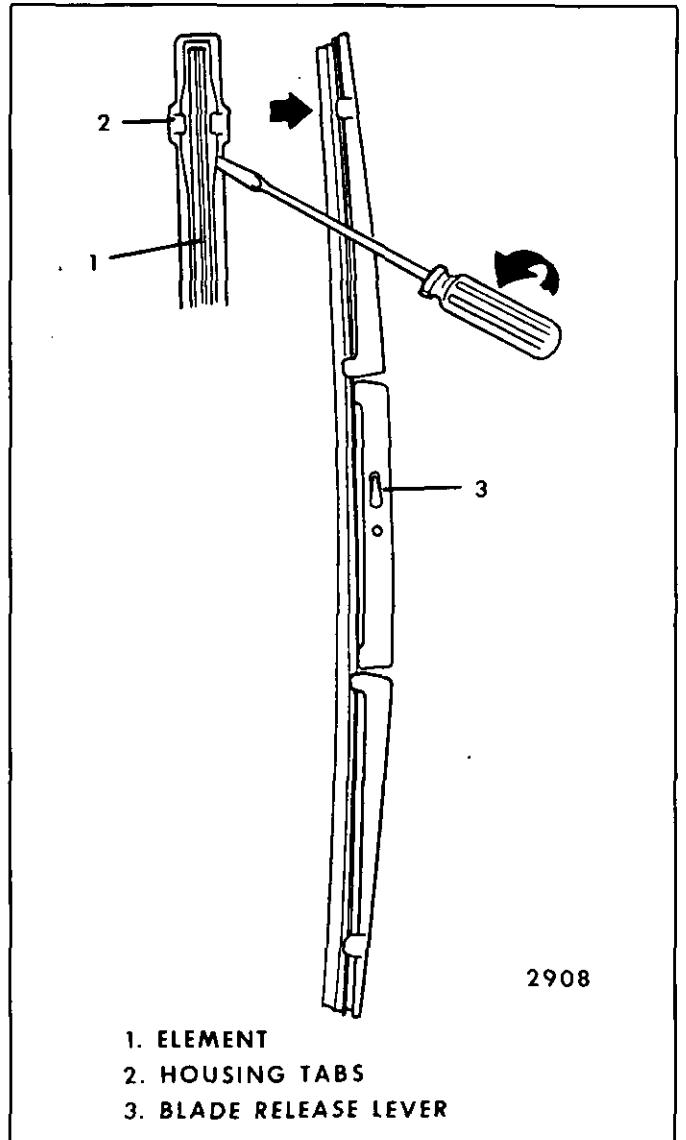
E2-20 Windshield Wiper Blade Arm Installation
